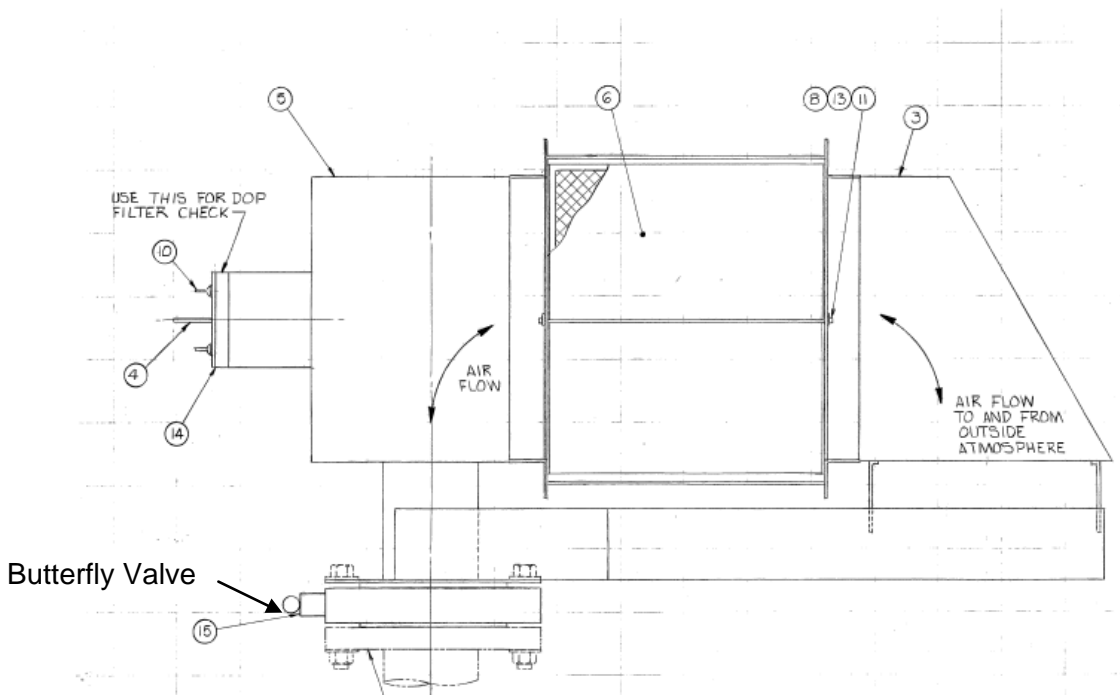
Example of Breather Filter Assembly Showing Valve [4].
